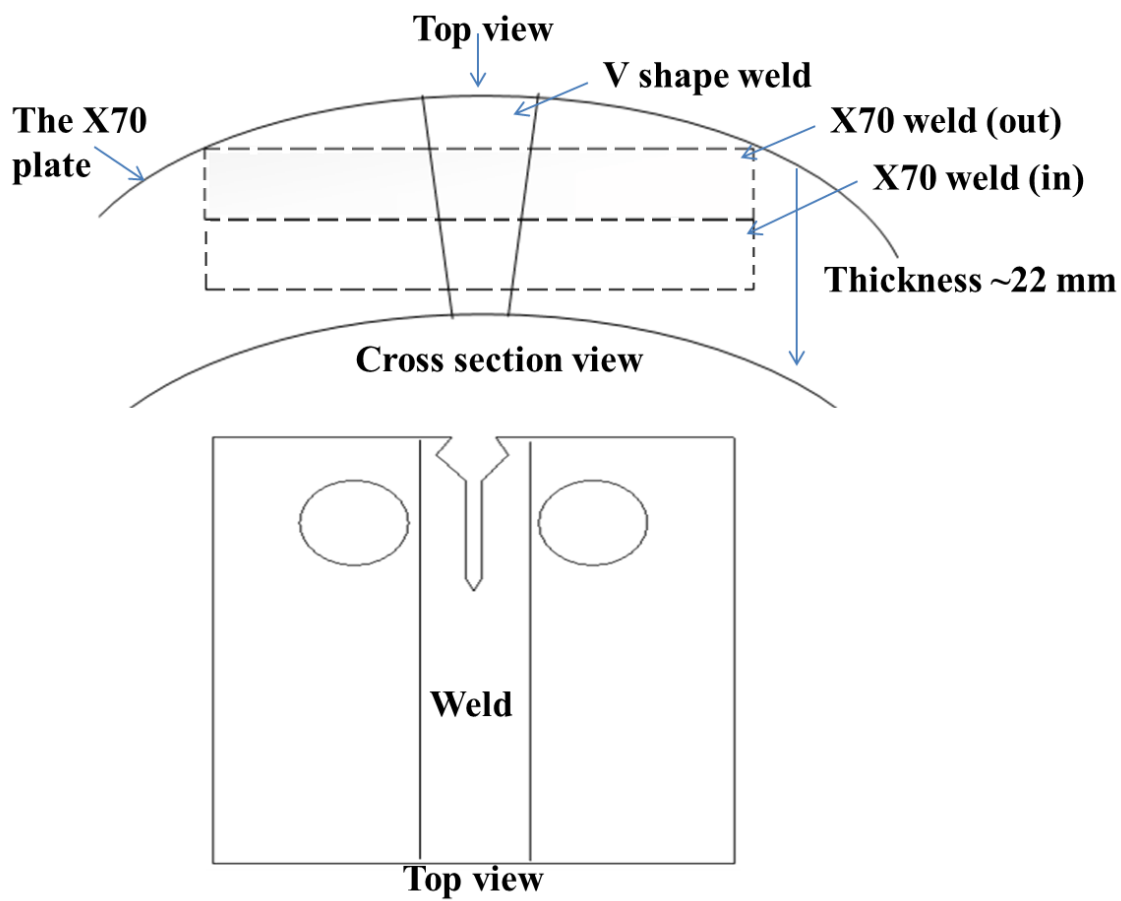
Sketch for the machining of the X70 pipeline steel weld sample
